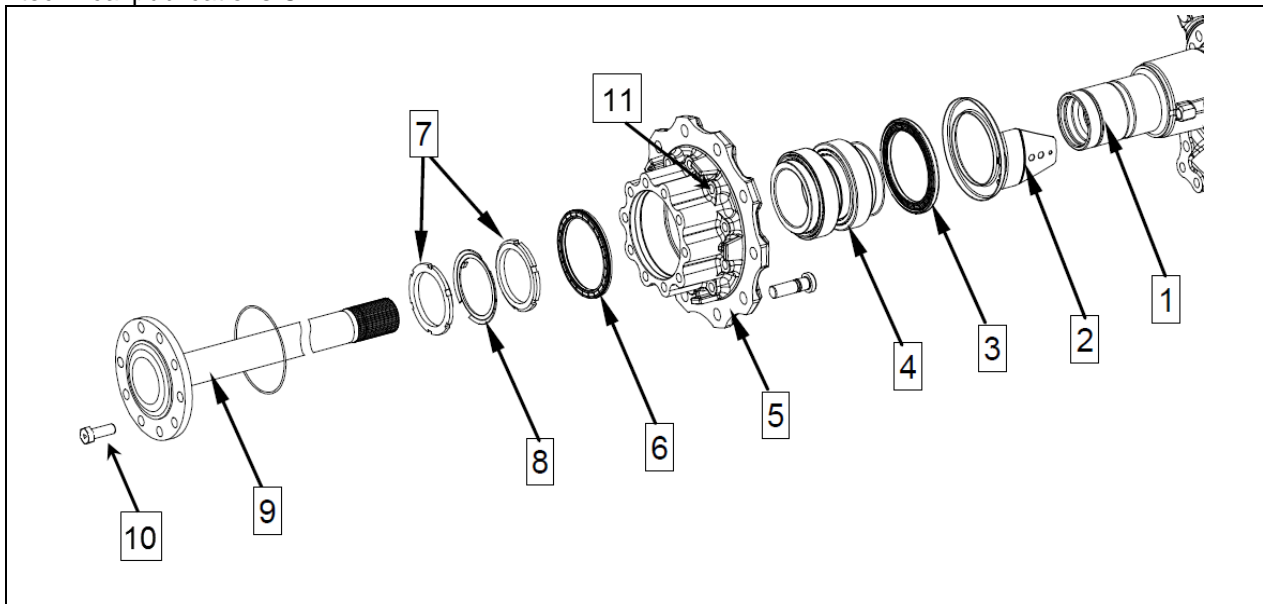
ZF A-132 DRIVE AXLE HUB ASSEMBLY
